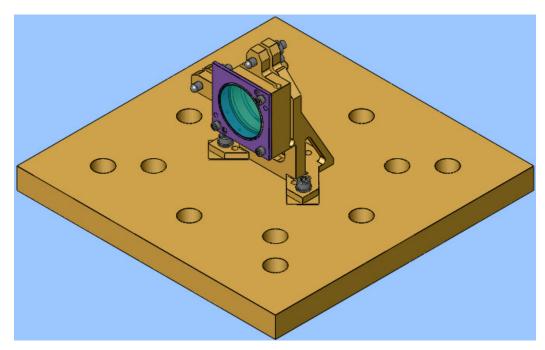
Tip-Tilt Mount Assembly Test Set-Up
